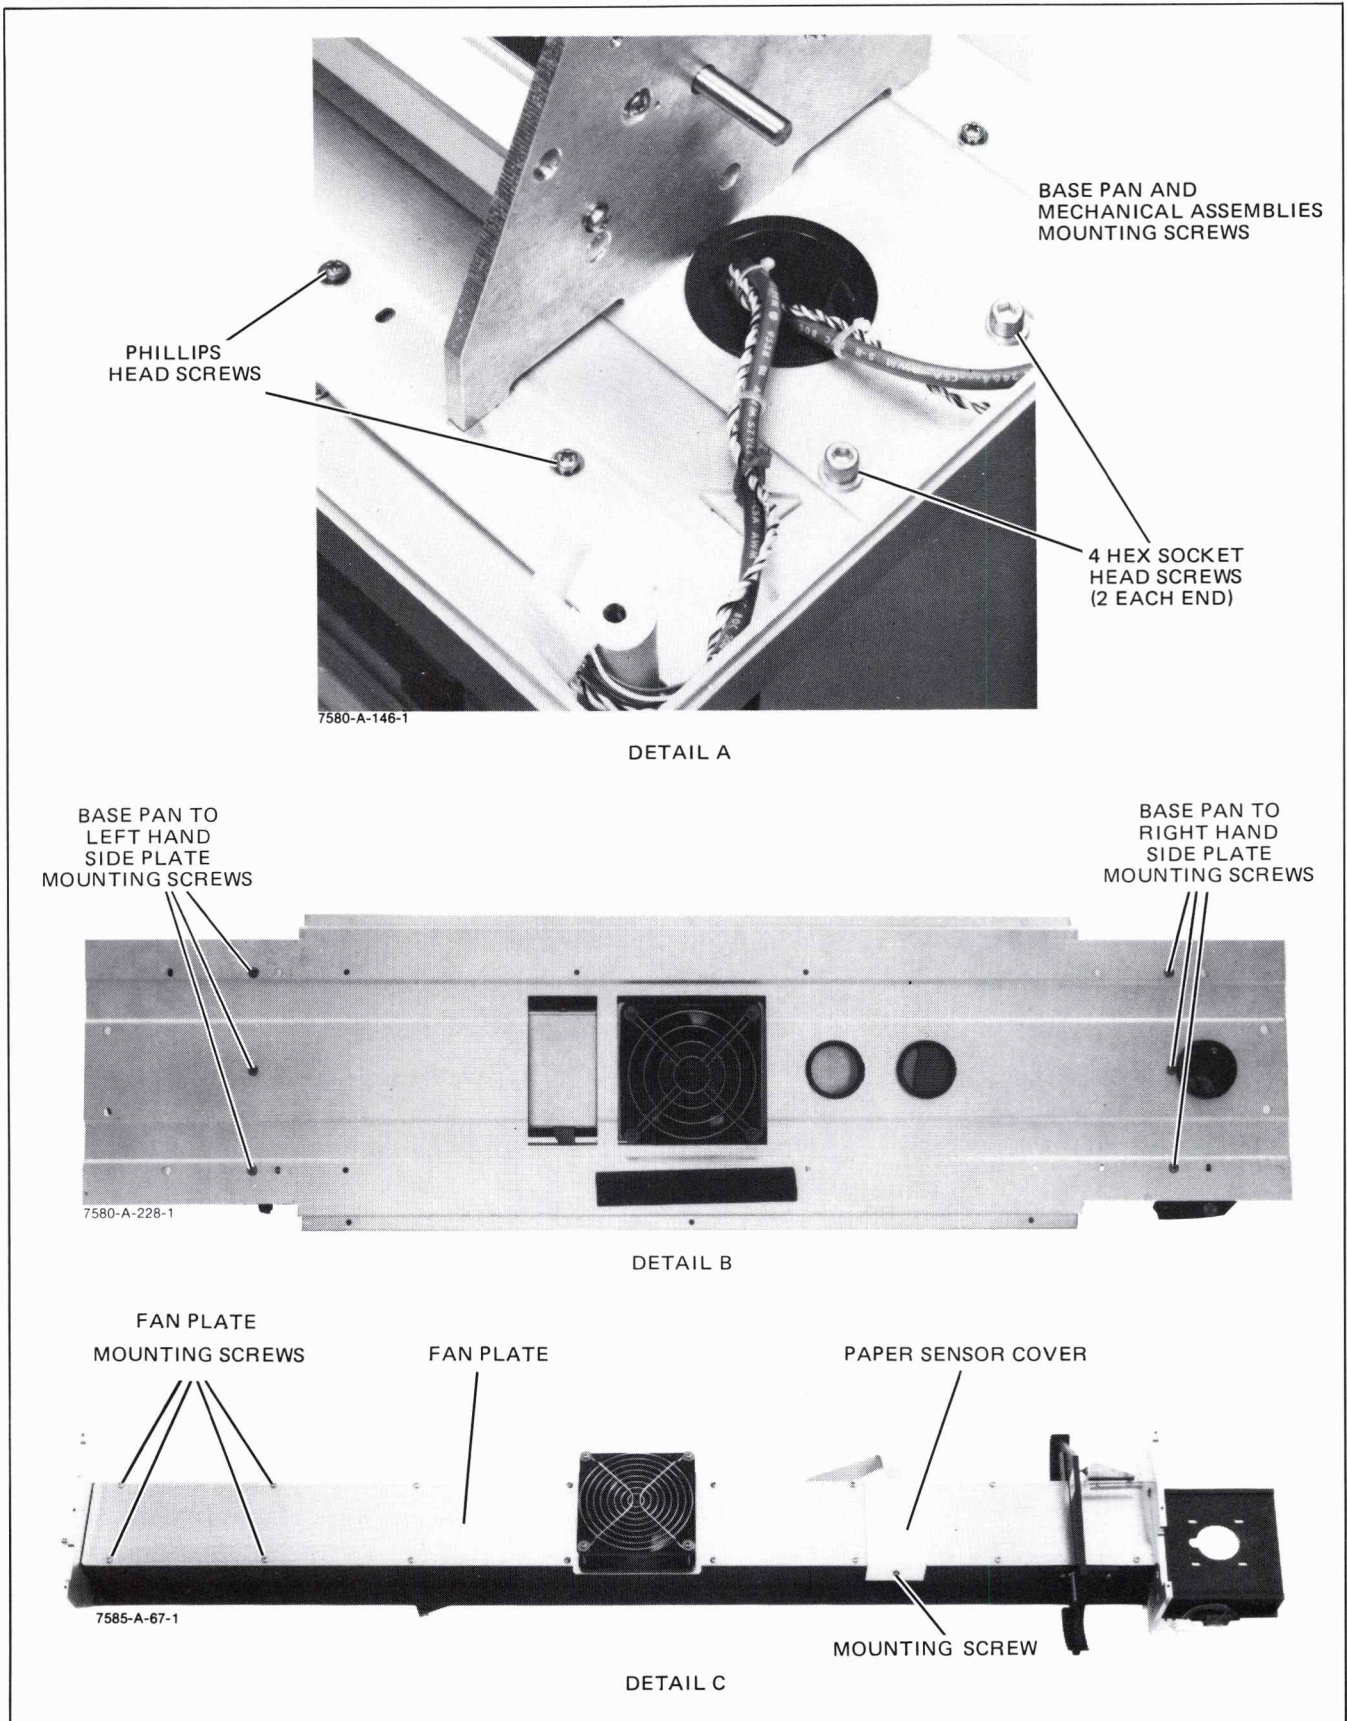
Grit Wheel Replacement (Sheet 1 of 2)
